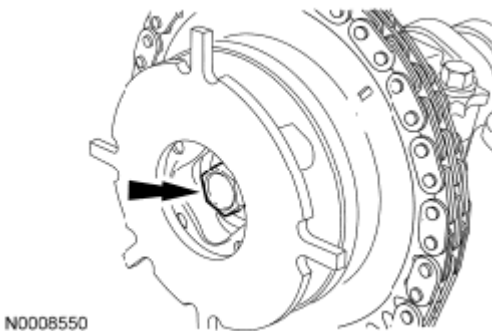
Locating Camshaft Phaser And Sprocket Bolt
